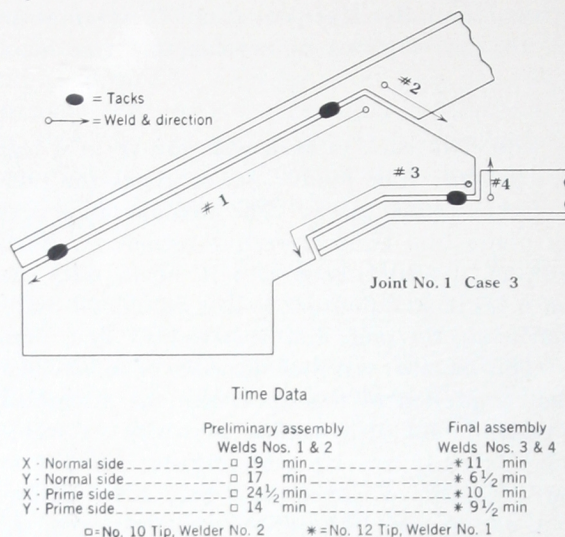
Diagrammatic representation of welding procedure used for this type of joint
